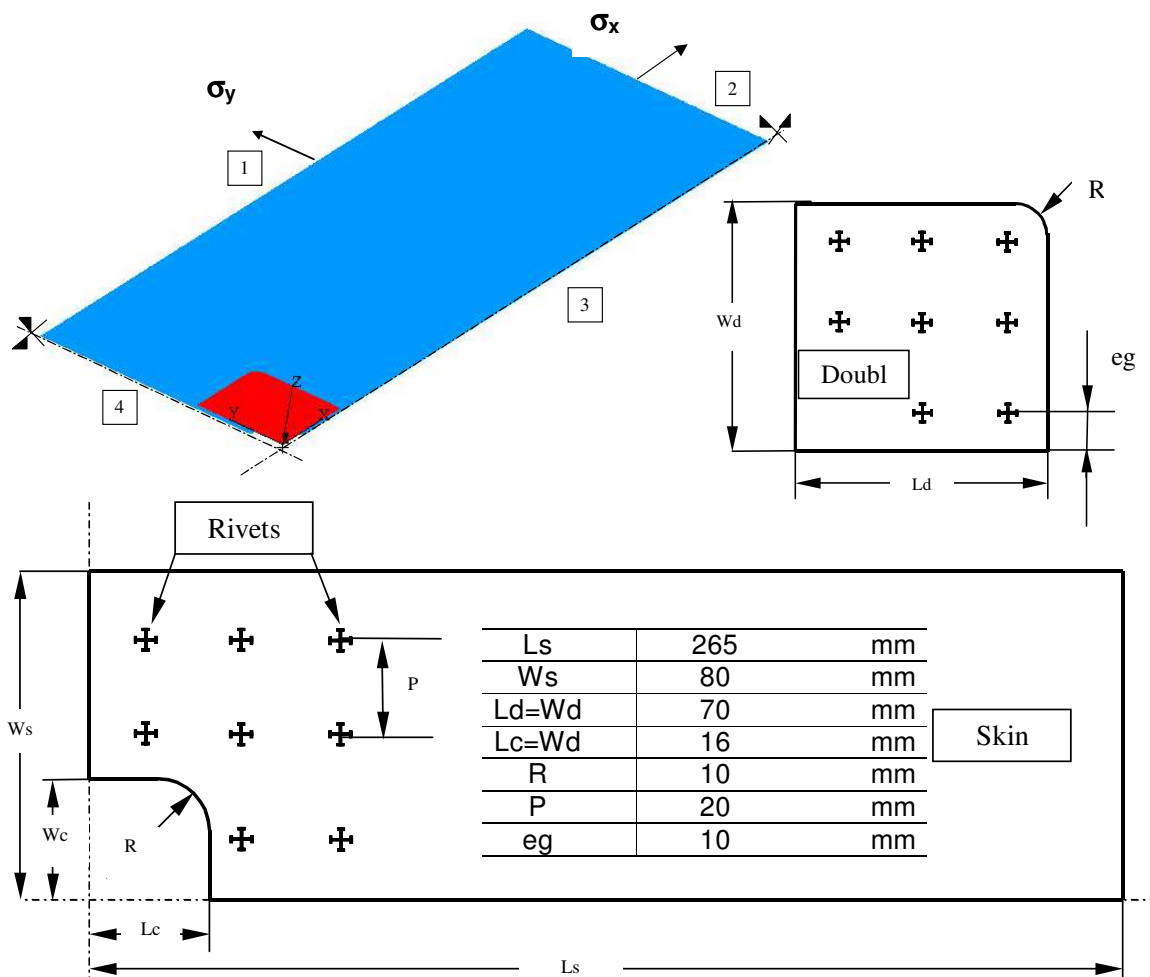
Skin doubler assembly with dimensions (only one quarter because of the symmetry).
